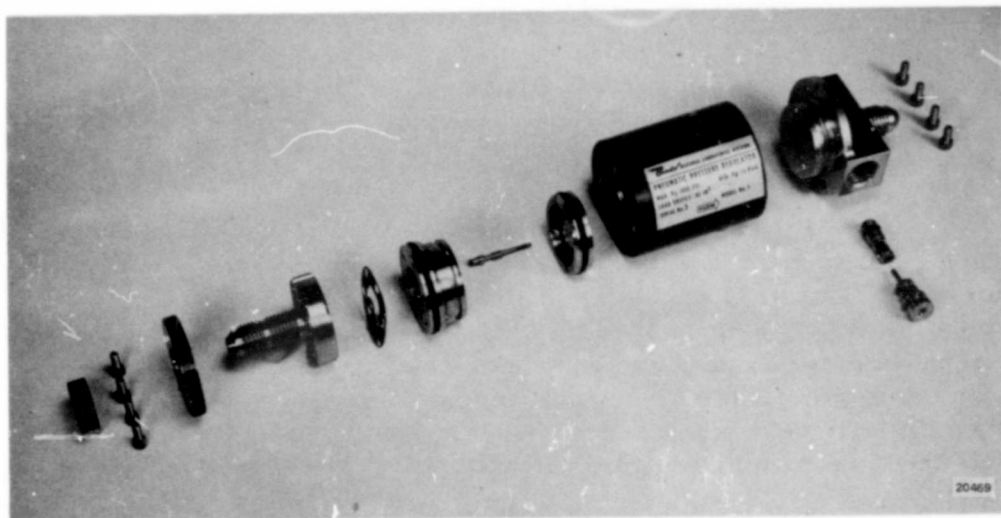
Hybrid Regulator Assembly (Exploded View)
